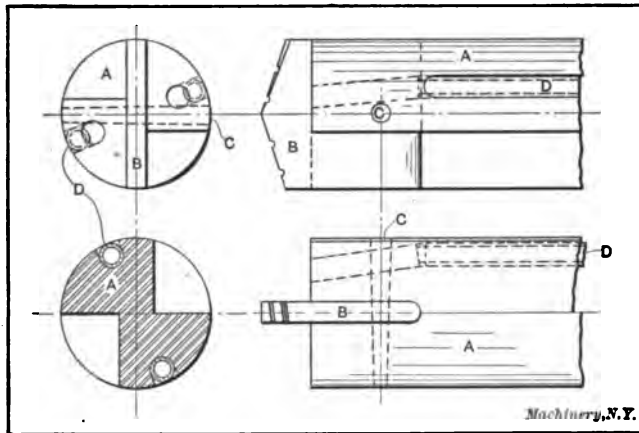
The Drill used for Deep Boring in the Machines shown in Figs. 8 and 4
